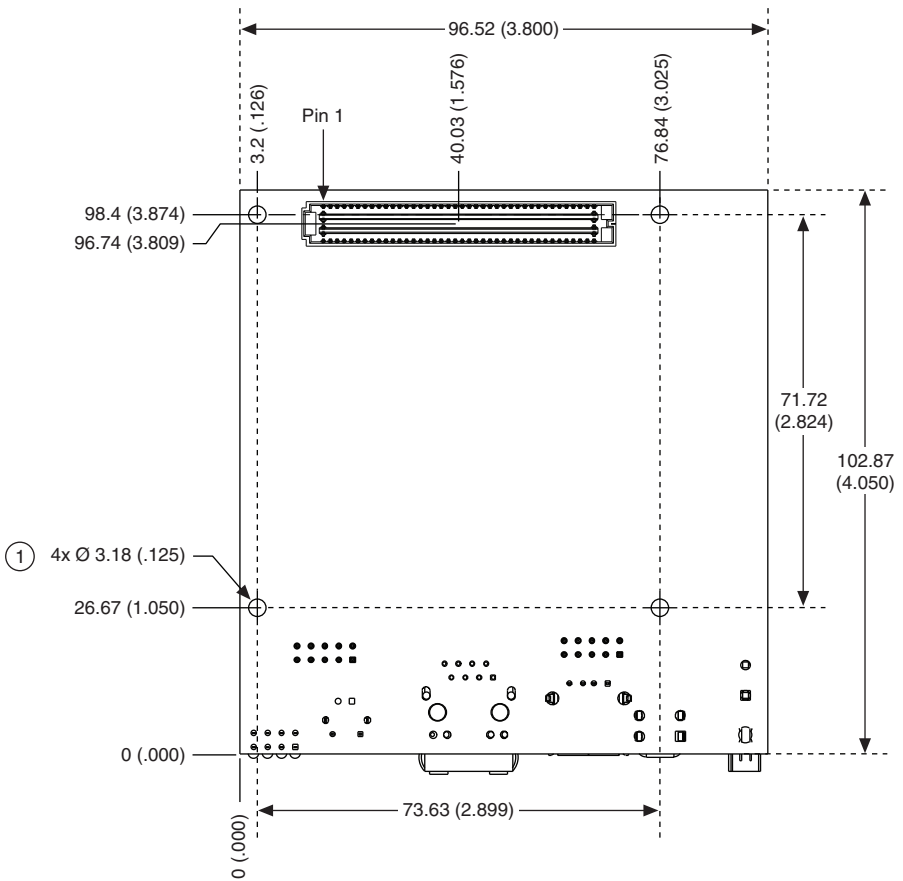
NI sbRIO-9605/9606 Primary-Side Dimensions in mm (in.)
